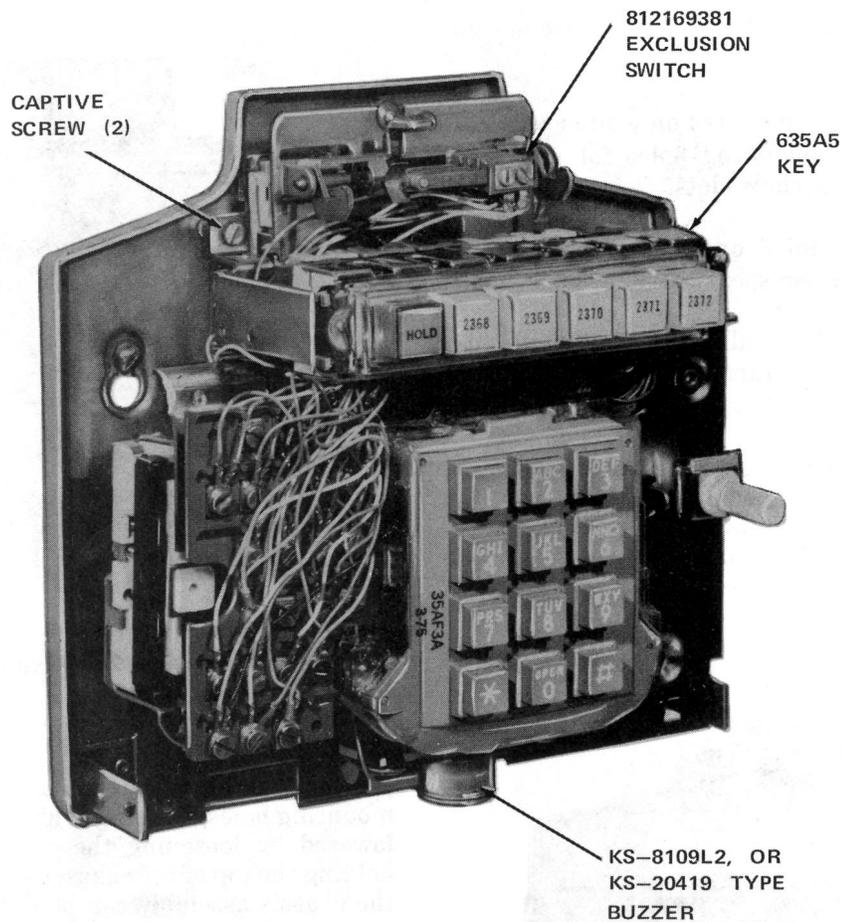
2851CM Telephone Set With Exclusion (Housing Removed)
